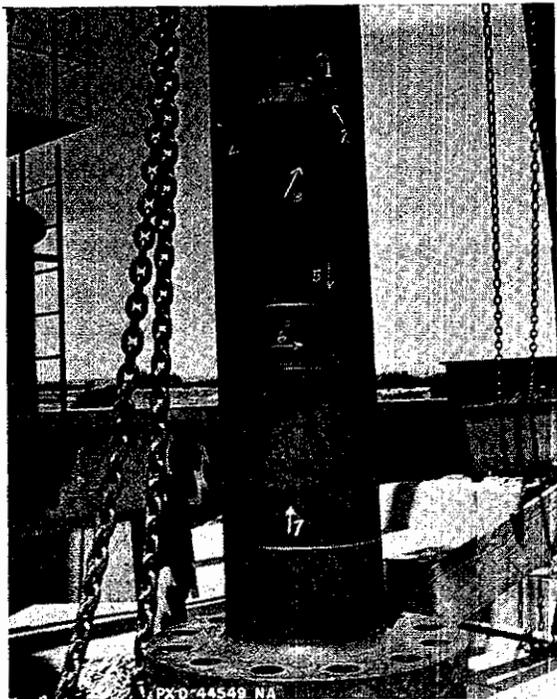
Girishk Powerplant Unit 1. Turbine shaft bearing area showing severe worn surfaces. Area between 2 and 5 is the main bearing area.
